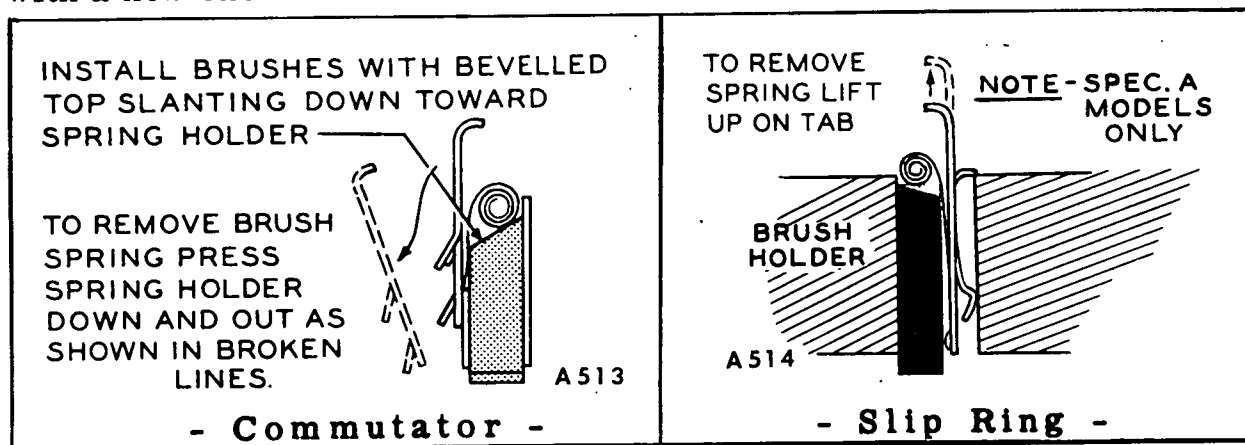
BRUSHES AND SPRINGS (Constant Pressure Type)
